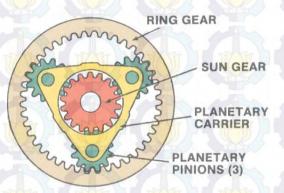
Planetary gear set components (https://wikis.engrade.com/planetarygearsetsoperati)
